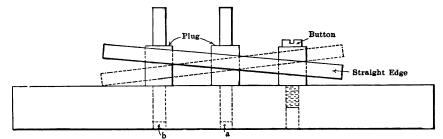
SHOWING METHOD OF USING STRAIGHT-EDGE ON BUTTONS
